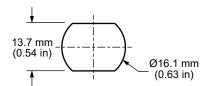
ANT-5GW-SPNF1 Mounting Hole Dimensions
